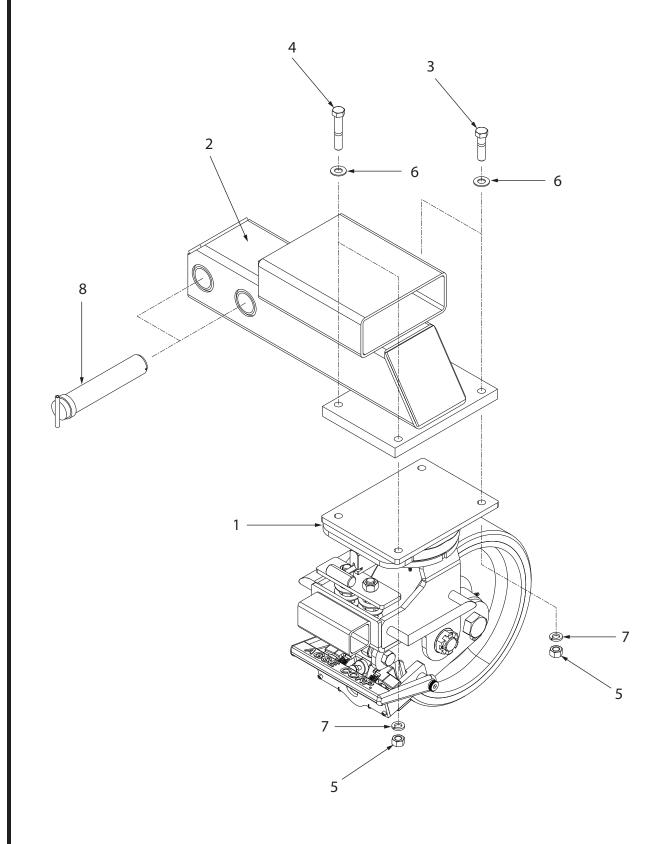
AGSE-E16616-S03 Caster Mount Assembly
